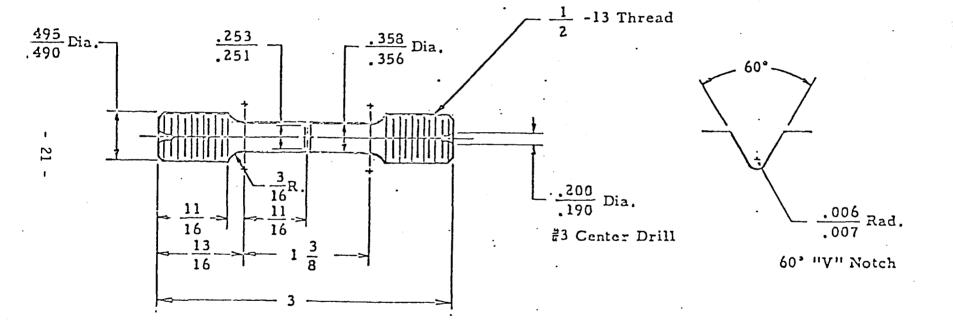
Notched Tensile Test Specimen. Dimensions in inches.
